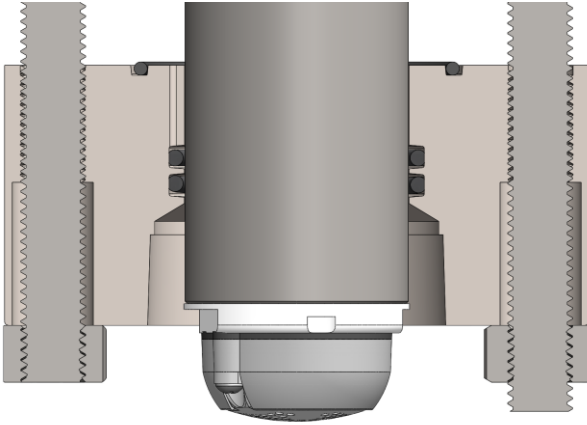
Cross-Section of Cap with sensor end pushed passed both internal O-rings.
